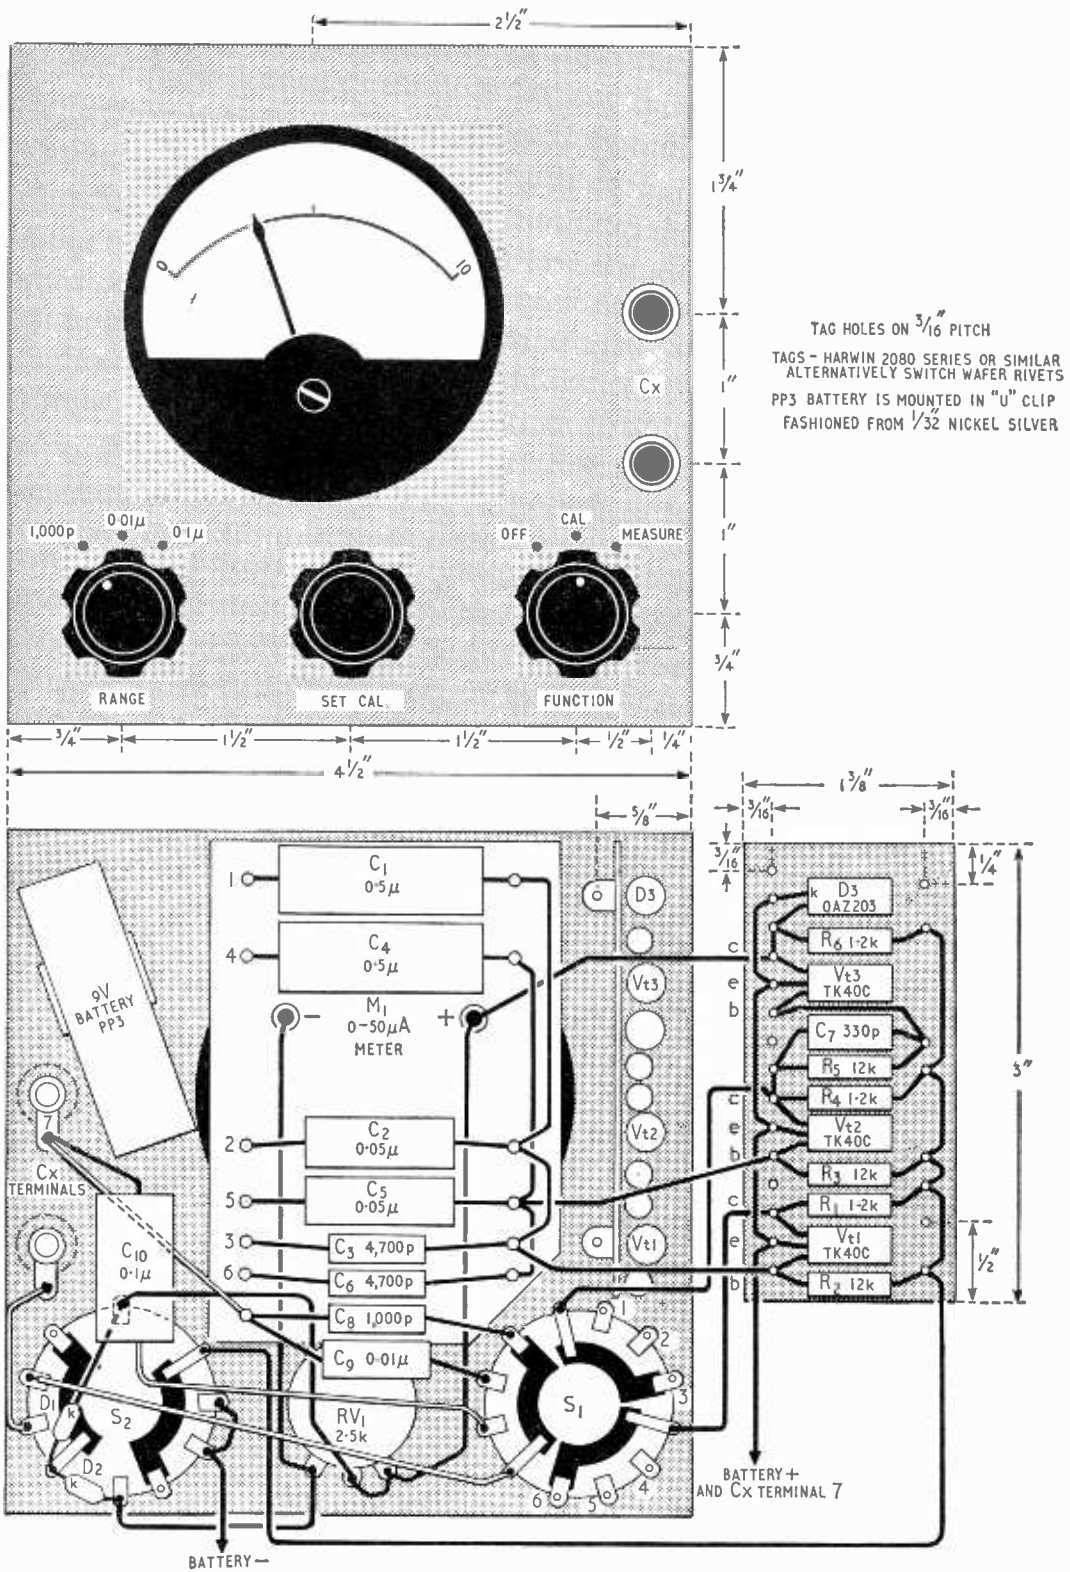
Layout and constructional details of the instrument. The tag boards are constructed from synthetic resin-bonded fibre sheets.
